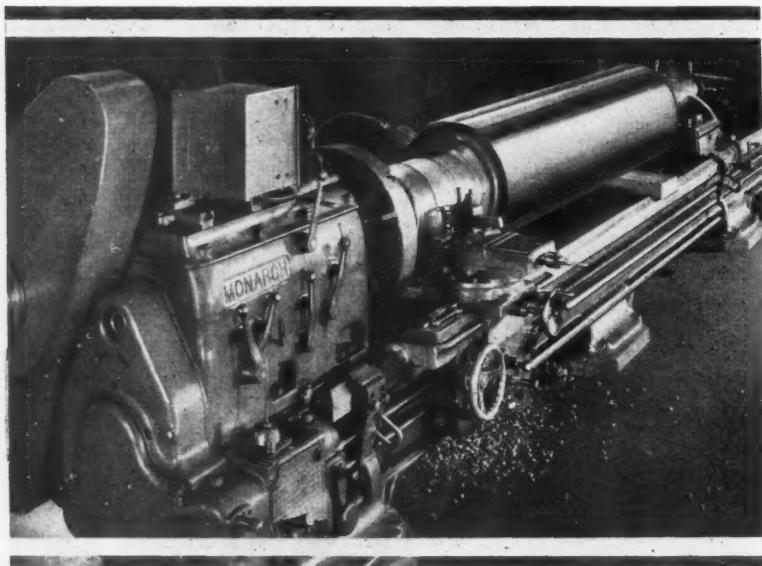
Machining a 28-inch Diameter 19,000-pound Paper Mill Roll on a 36-inch by 32-foot Monarch Lathe. The 16-inch Journal Bearings on the Roll are Being Turned Down to 12 Inches in Diameter to Fit Roller Bearings
